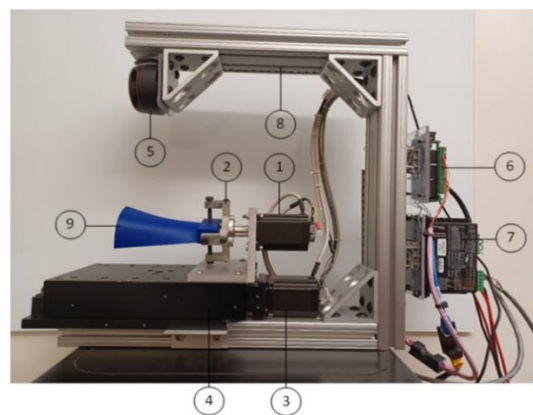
Coordinate Measuring Machine. 1. stepper motor of the rotary joint; 2. mounting device; 3. stepper motor of the linear joint; 4. linear positioning slide; 5. *RPLiDAR A2* laser scanner; 6. microcontroller; 7. stepper motor drivers; 8. C-shape frame; 9. object to be digitized.
